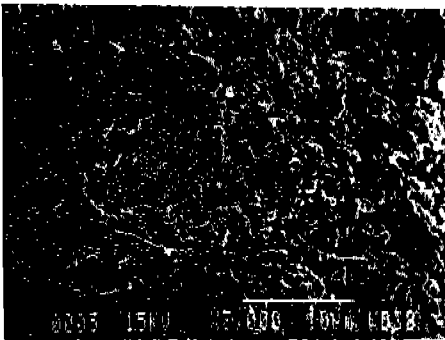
Fracture surface of MA754 friction weldment produced under the condition of (Friction Pressure/Friction Time/Upset Pressure)=(300 MPa/1.5 sec/500 MPa), showing a fracture of mixed-type.
